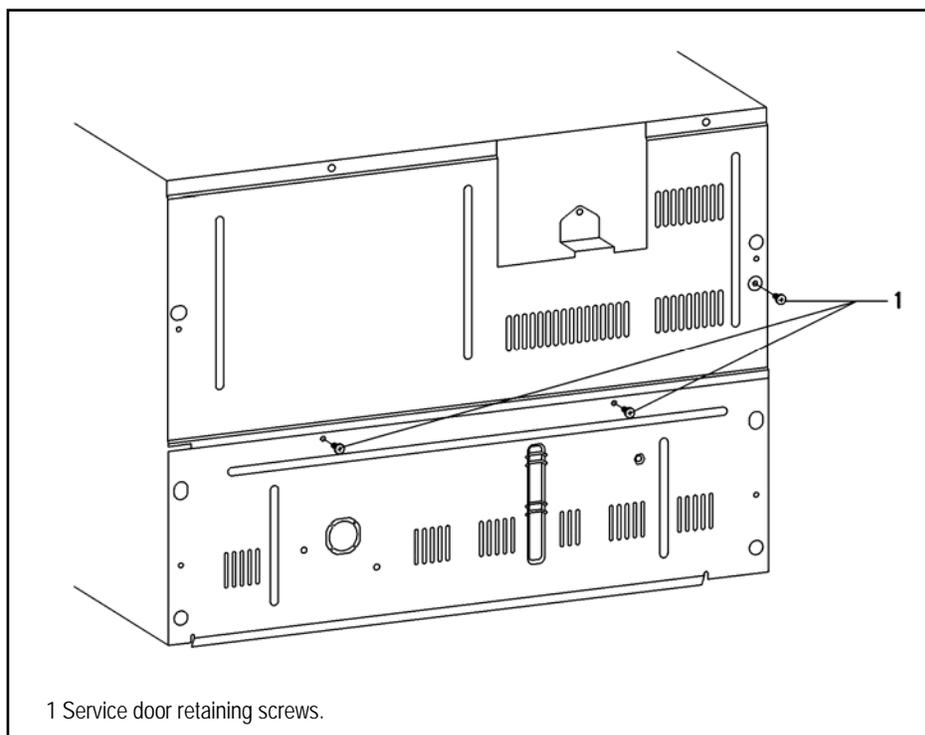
CVA4070 Service Door Steam Pump Removal
